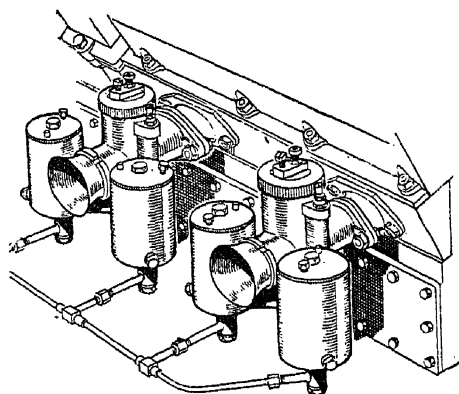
Multiple Carburetors with Twin Float Chambers (Autocar).
